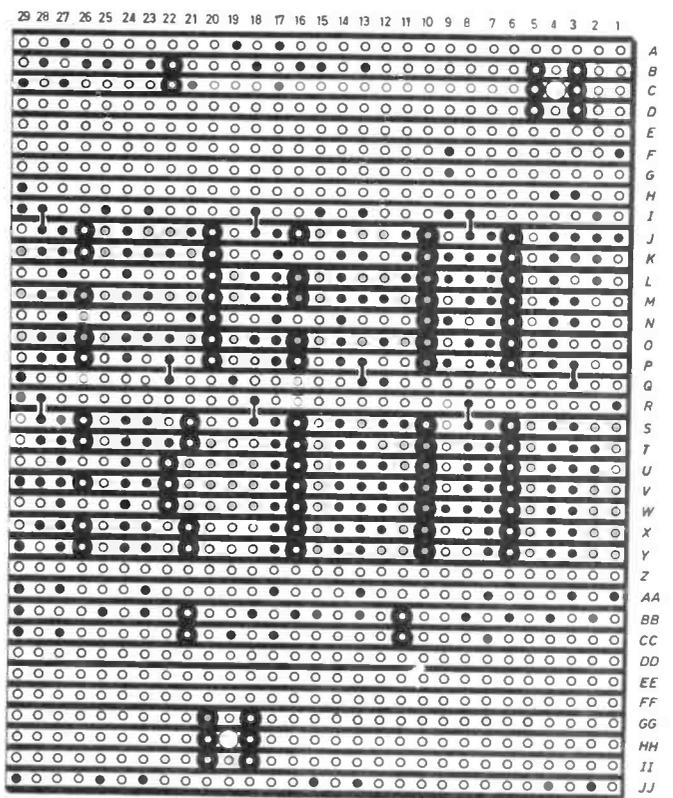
The underside of the stripboard showing breaks in the copper tracks and link connections to be made.
